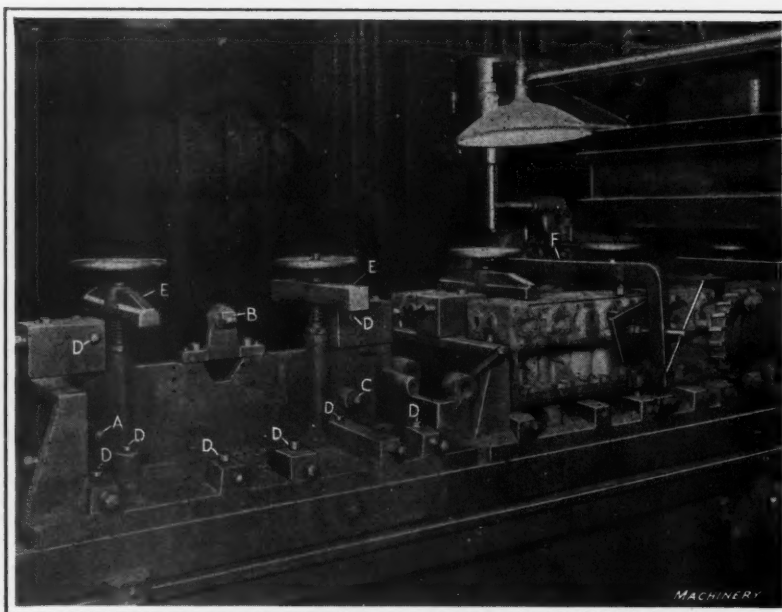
Work-holding Fixture and Method of setting up Work on Beaman & Smith Multiple-spindle Milling Machine for First Operation on Hudson Cylinder Blocks
